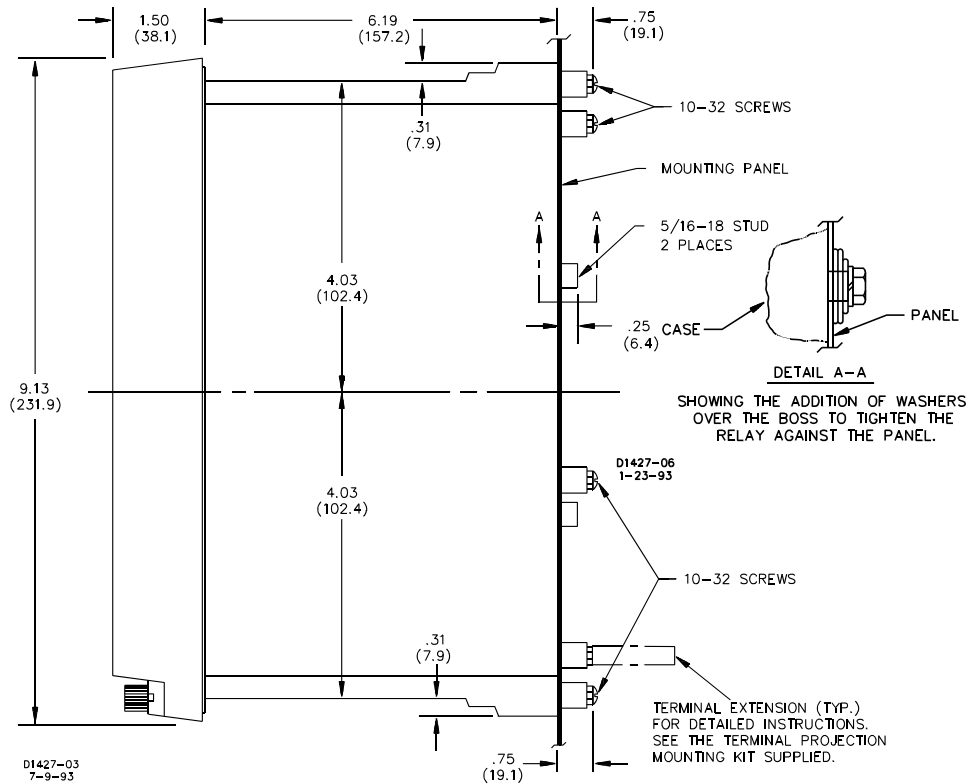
S1 Case, Double-Ended, Outline Dimensions, Projection Mounting, Side View
